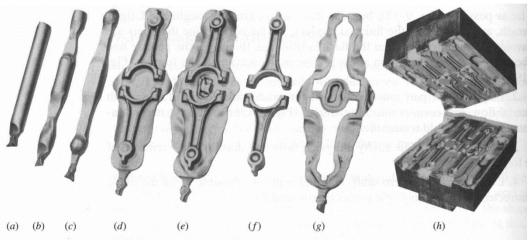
Hammer forging two connecting rods: (a) bar stock; after (b) fullering, (c) "rolling," (d) blocking, (e) finishing, (f) trimming; (g) the flash; and (h) the forging dies. (Courtesy Forging Industry Association, Cleveland, Ohio.)
